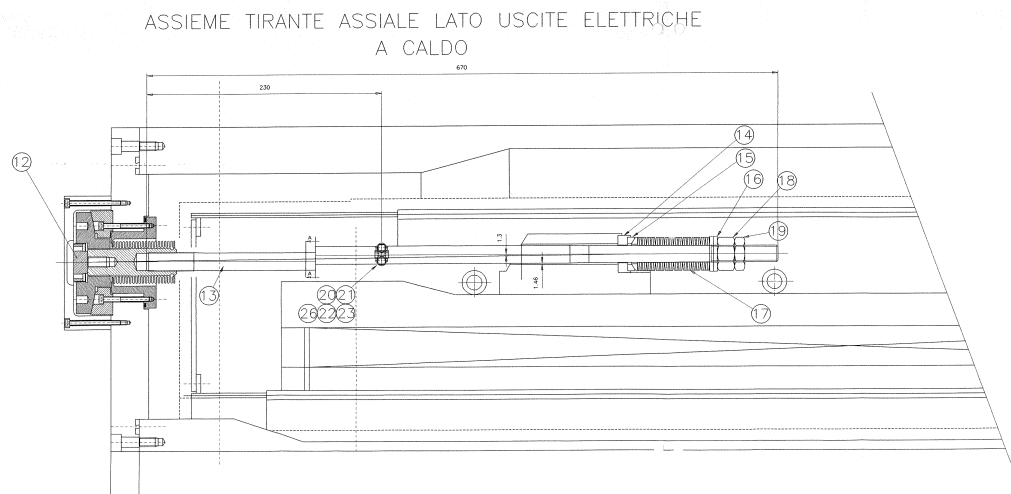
Original Ansaldo drawing: Axial Tie Rod Assembly
